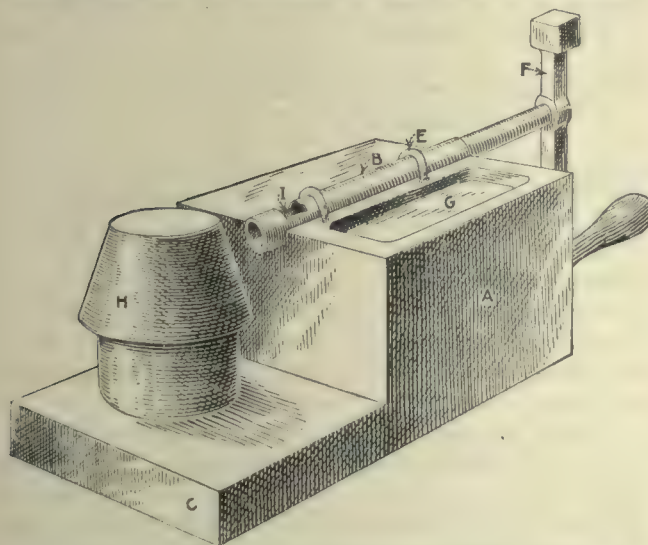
INSERTING SCREWS IN A FUSE BODY
